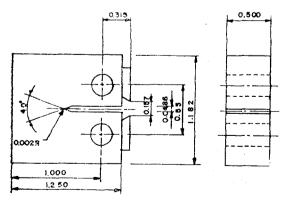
Specimen Geometry and Dimension (Unit: inch)
